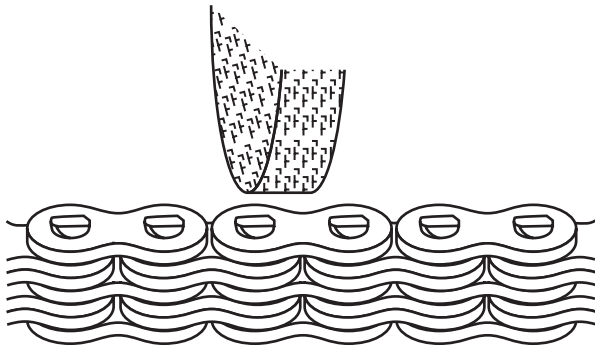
GRINDING OFF THE PIN HEAD AT JOINT TO BE SEPARATED
